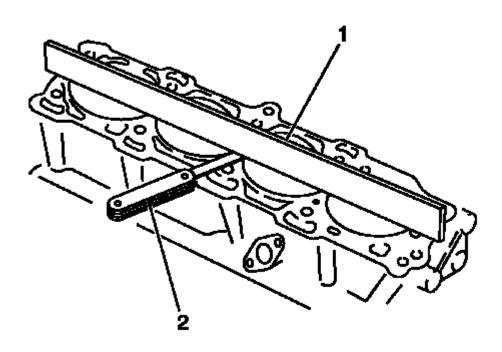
Checking Deck Surface For Flatness Courtesy of GENERAL MOTORS COMPANY
